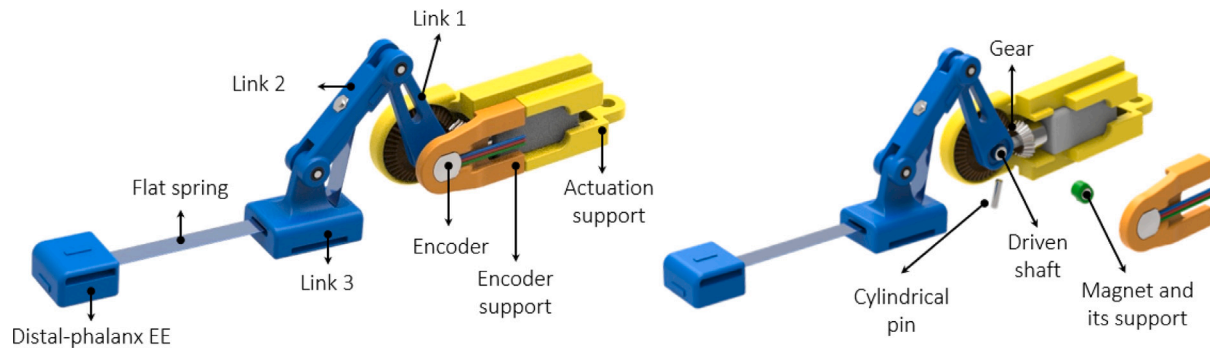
The thumb module prototype: on the left, the whole module, and on the right, an exploded view of the magnet and its housing (green colored), the driven shaft, integral to Link 1, and the cylindrical pin for the a/a movement.
